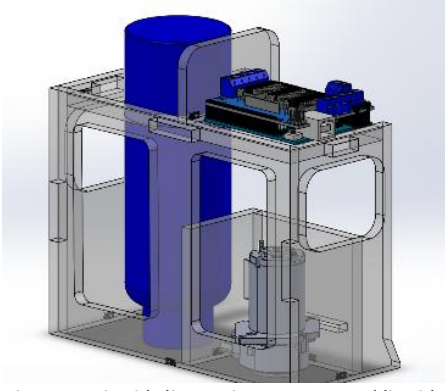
Liquid dispensing system and liquid storage container viewed in SolidWorks.
